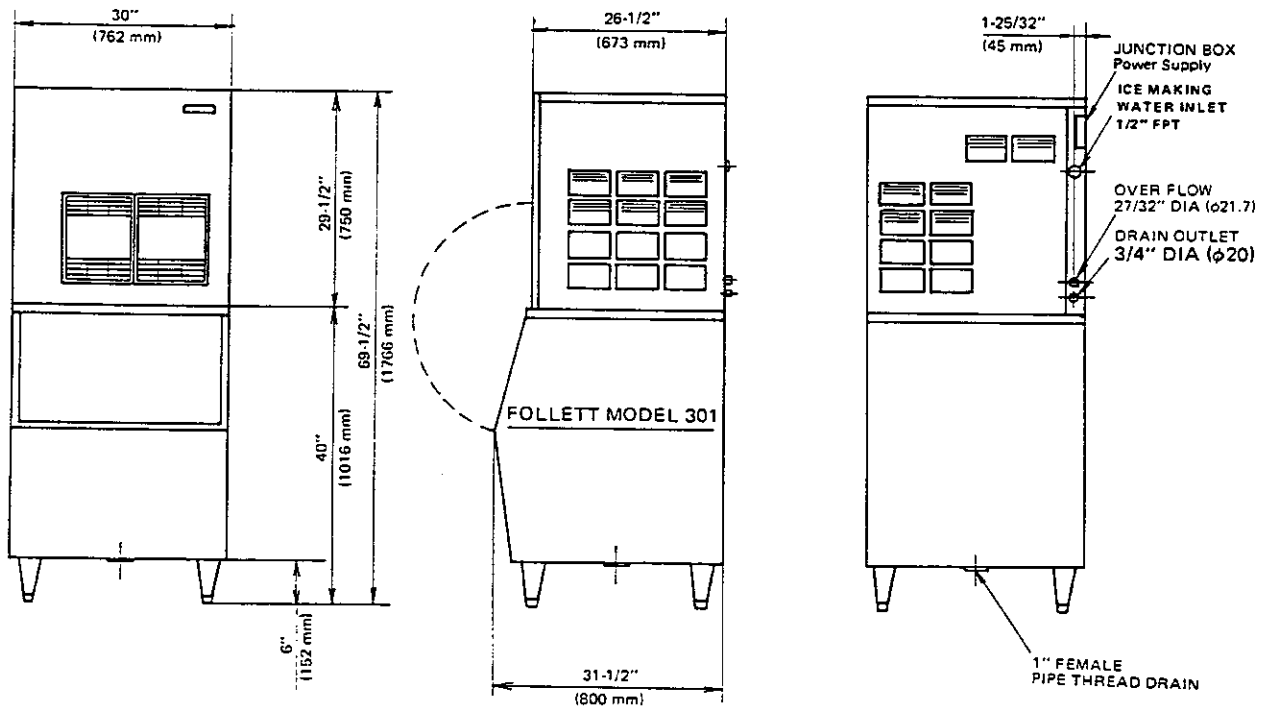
Dimensional drawing for Ice Storage Bin Optional
